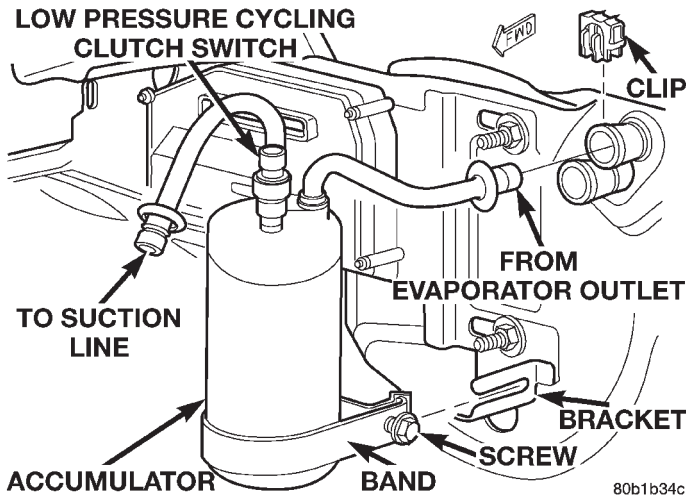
Low Pressure Cycling Clutch Switch Remove/Install
